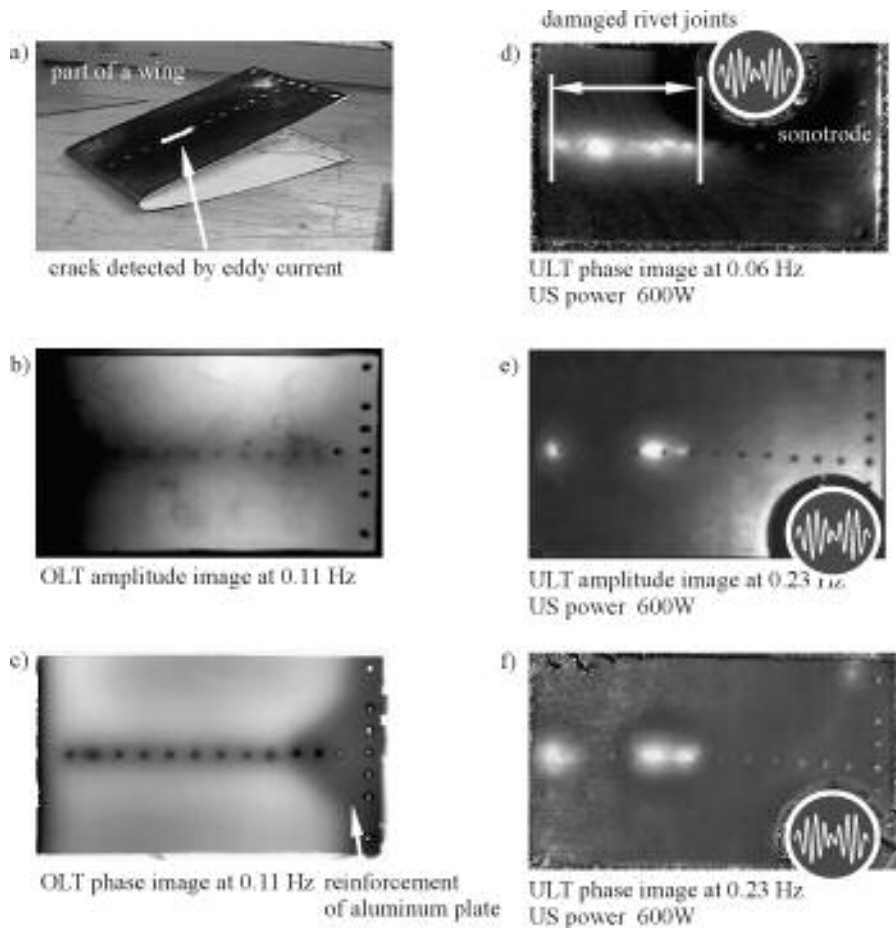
Detection of a crack in an aluminium plate and the resultant damaged rivet joints.
